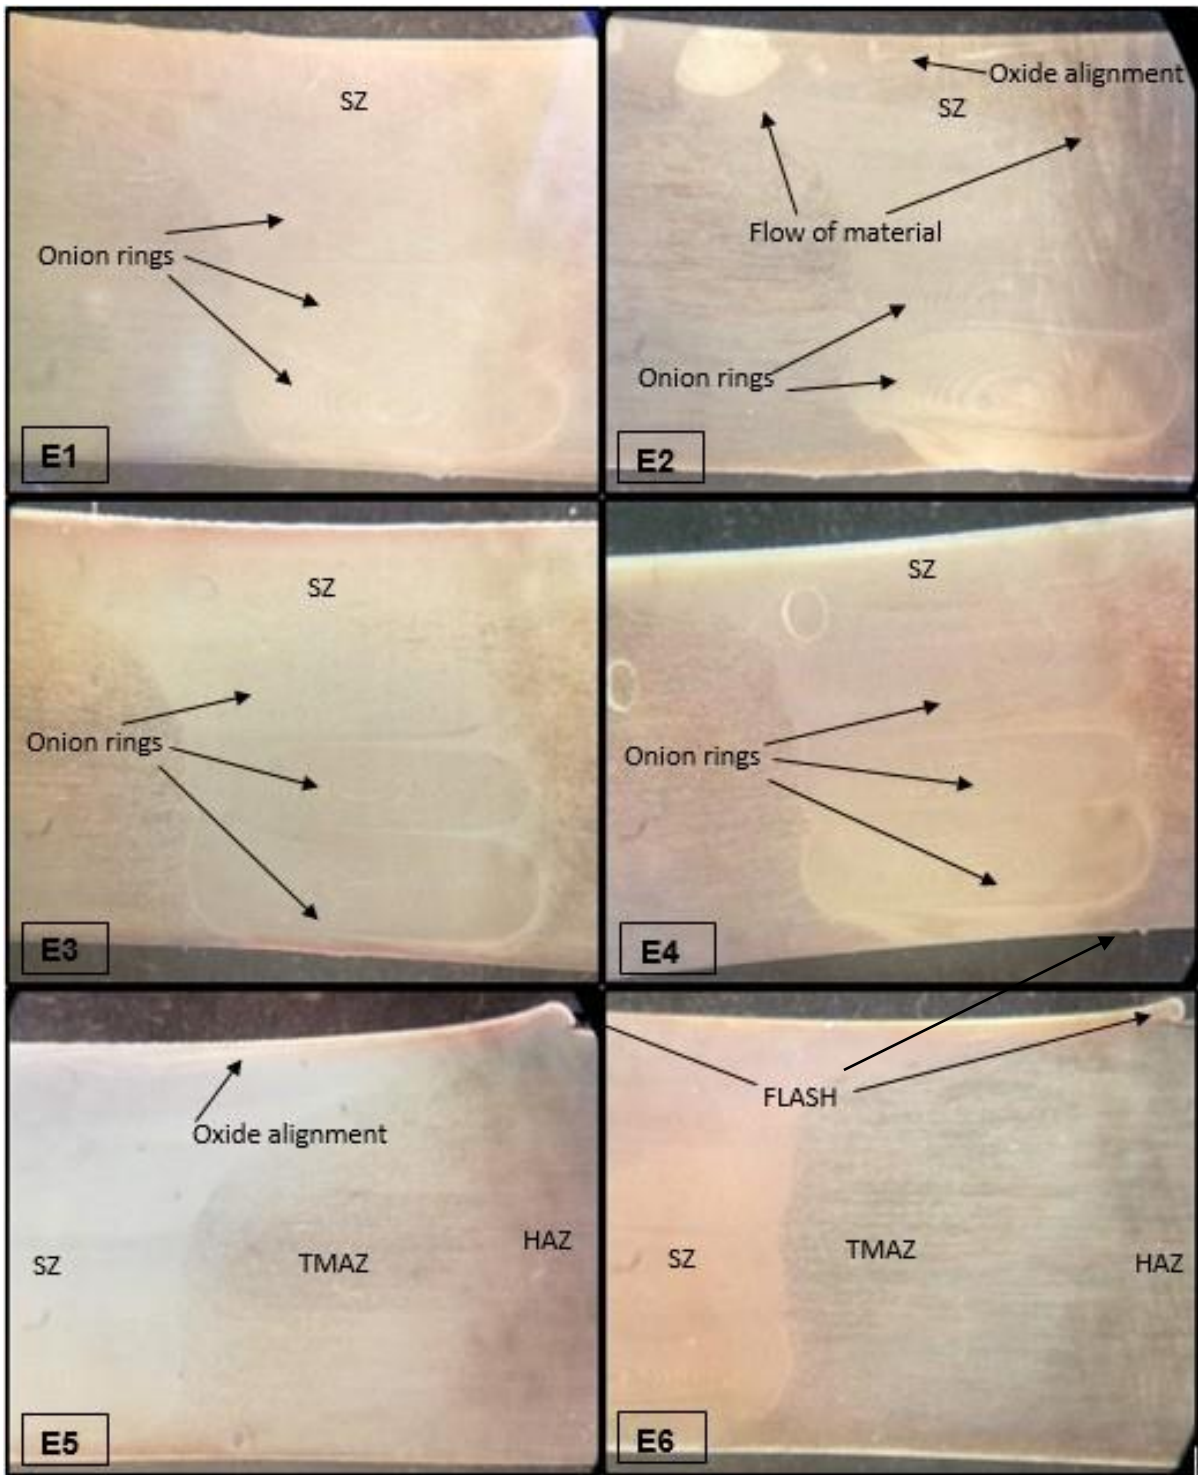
Shows the macrostructure of FSW specimens taken from the end of the weld, welded at six different rotational speeds
